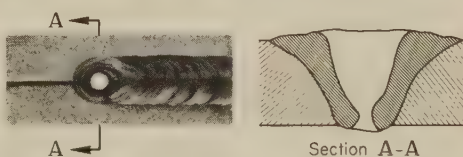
Appearance of a keyhole weld in  $\frac{1}{4}$ -in.-thick stainless steel plate
